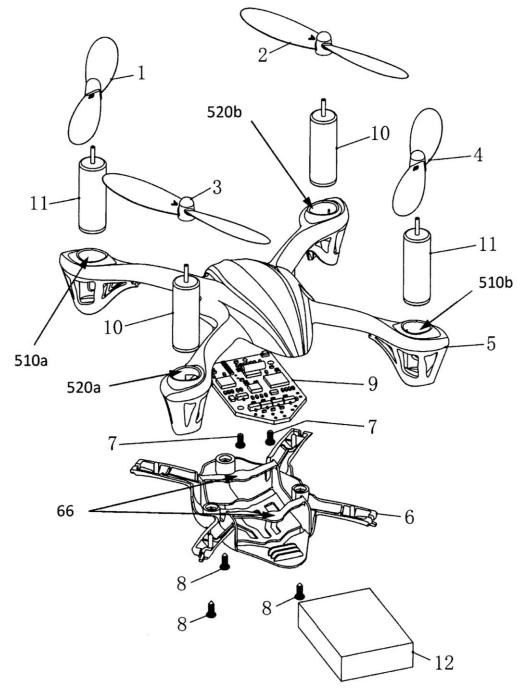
Exploded view of WO 2014067224 A1. [1]
